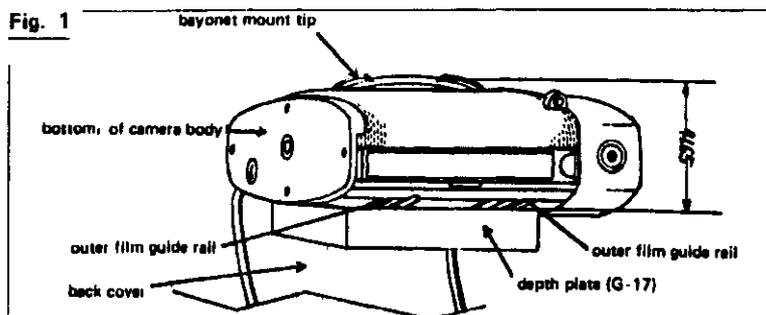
shows a camera body placed upon depth plate (G-17) after removal of the back cover.
